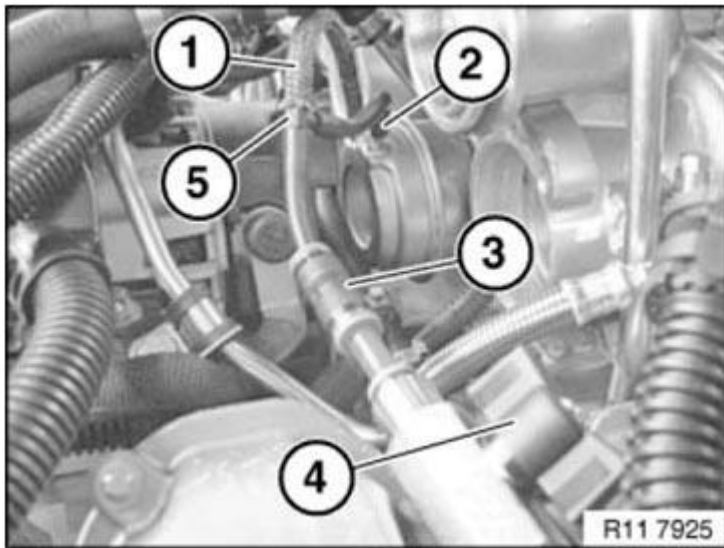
Identifying Blue Vacuum Line, Vacuum Unit And Quick-Release Coupling
